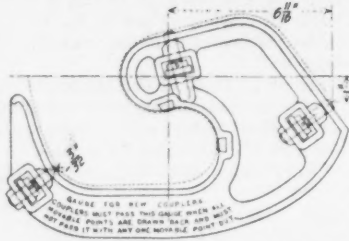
Proposed Gage for New M. C. B. Couplers Built to Proposed Contour Lines.
